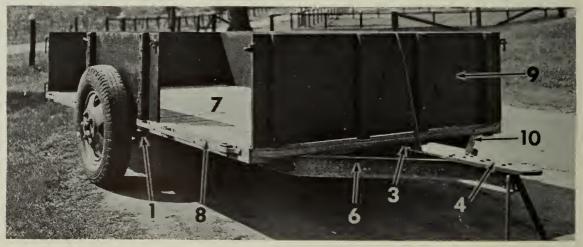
When automobile axles are used in making trailer carts the wheels should be kept in proper alignment. Wheels should toe-in slightly at the front.
